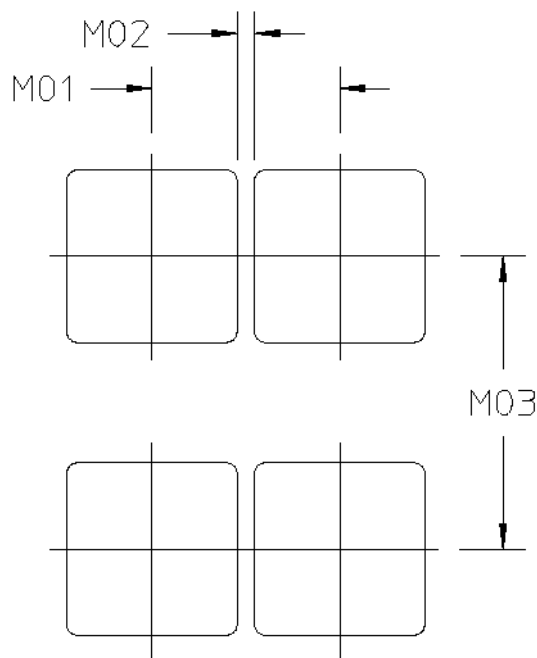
RECEPTACLE MINIMUM PITCH DIMENSIONS
